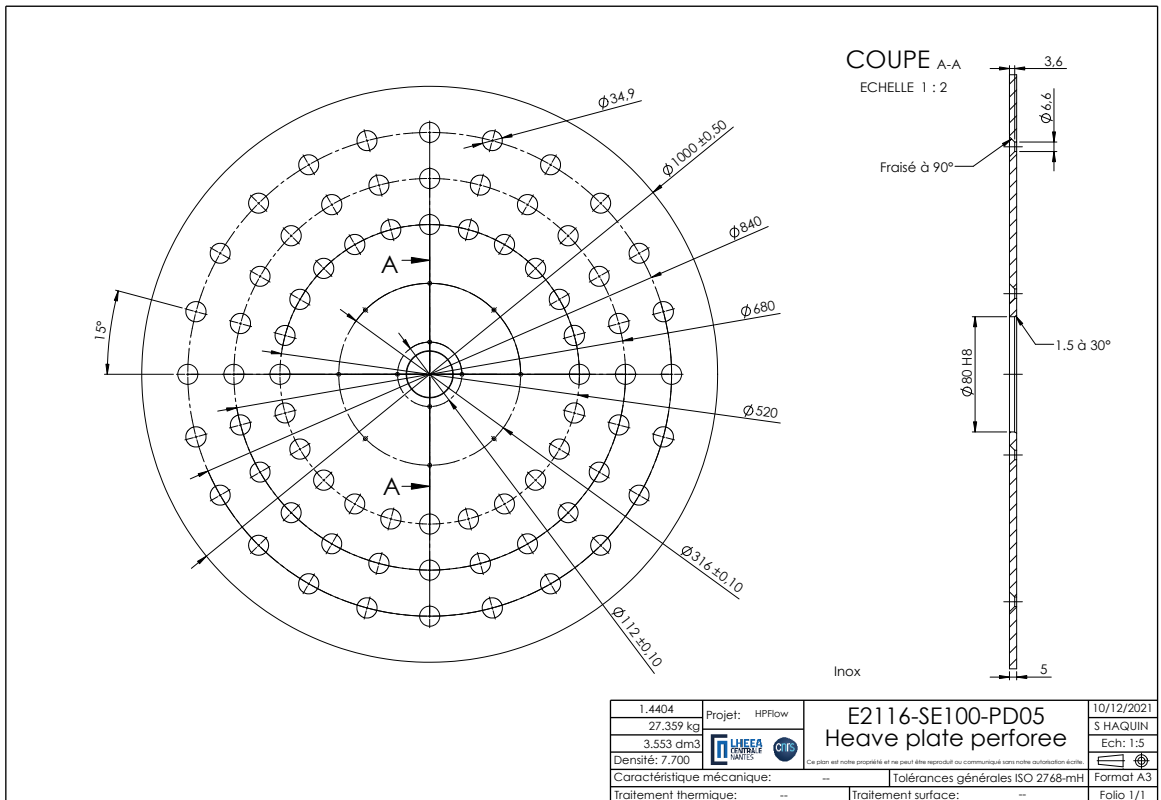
Drawing of the perforated plate with diameter 1.0 m.
